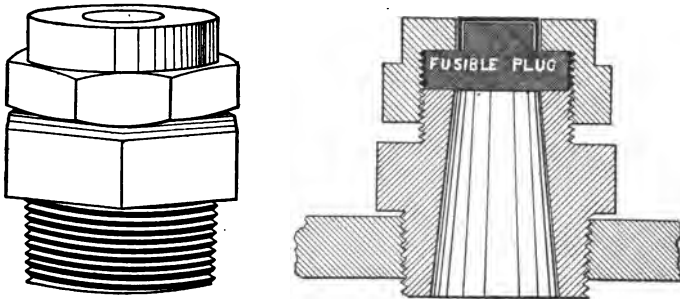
Fusible Plug. At Right is Sectional View of Plug Attached to Crown Sheet of Boiler, to Give Automatic Warning in Case of Overheating of Plates.
